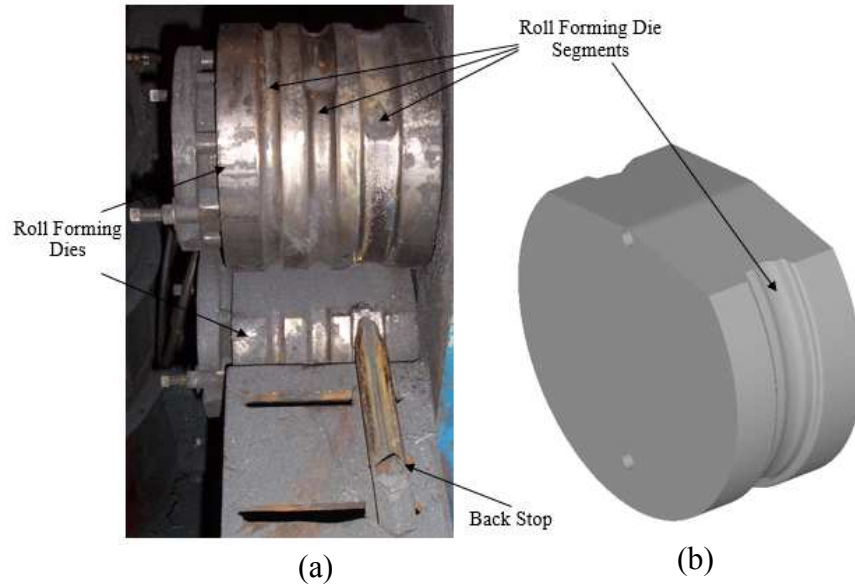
Roll forming dies used in the existing wrench forging process. (a) Actual roll forming die set used at GBDF and (b) Three dimensional geometry representation of one segment used in DEFORM
